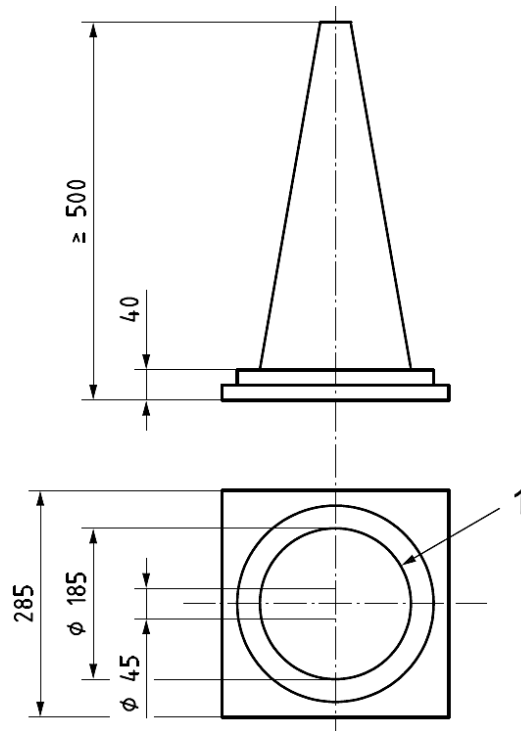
Appearance and dimensions of cones (dimensions shown in millimeters)
